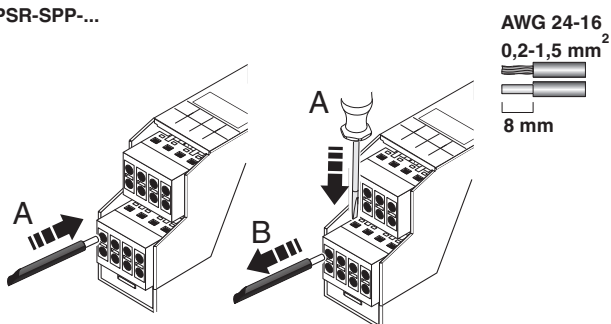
Connecting the cables for PSR-SPP-... (Spring-cage terminal block)
